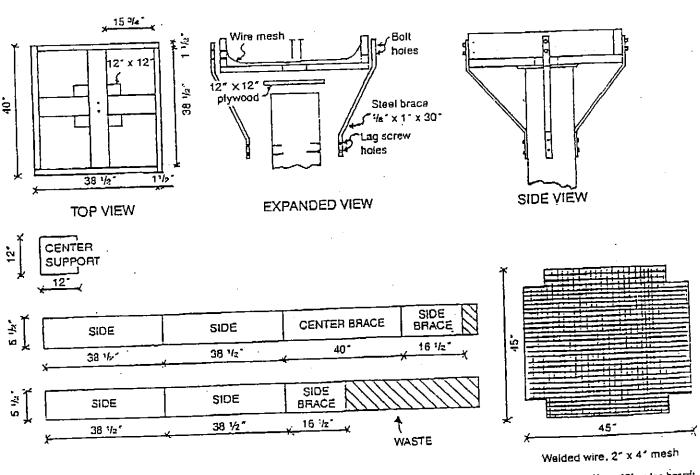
Diagram of an osprey nest platform. To construct the platform, the following materials are required: (1) 2° × 6° × 12′ cedar board: (1) 2° × 2° × 8′ cedar board; (1) 12° × 12° × V2° exterior plywood; (1) 45° × 45° piece of heavy duty were mesh: (20) galvanized 40D nails: (4) 1/8° × 1° × 30° steel strapping; (8) 2 1/2° × 1/2° bolts with washers and nuts; (8) 4° × 1/2° lag screws; (1) 6° or 8° diameter cedar post, 20′ to 10′ long; and wood preservative and stain. To prevent splitting, predrill all nails and bolt holes. Treat the entire structure with wood preservative and stain intown. To encourage use by ospreys, wire several sticks into the nest. (Platform drawing by C.L. Henderson, J. Voigt-Englund, and M. Miller. This diagram and information appears in Woodworking for Wildlife, Henderson [1984]. Please see this publication for additional information on platform construction and placement.)
